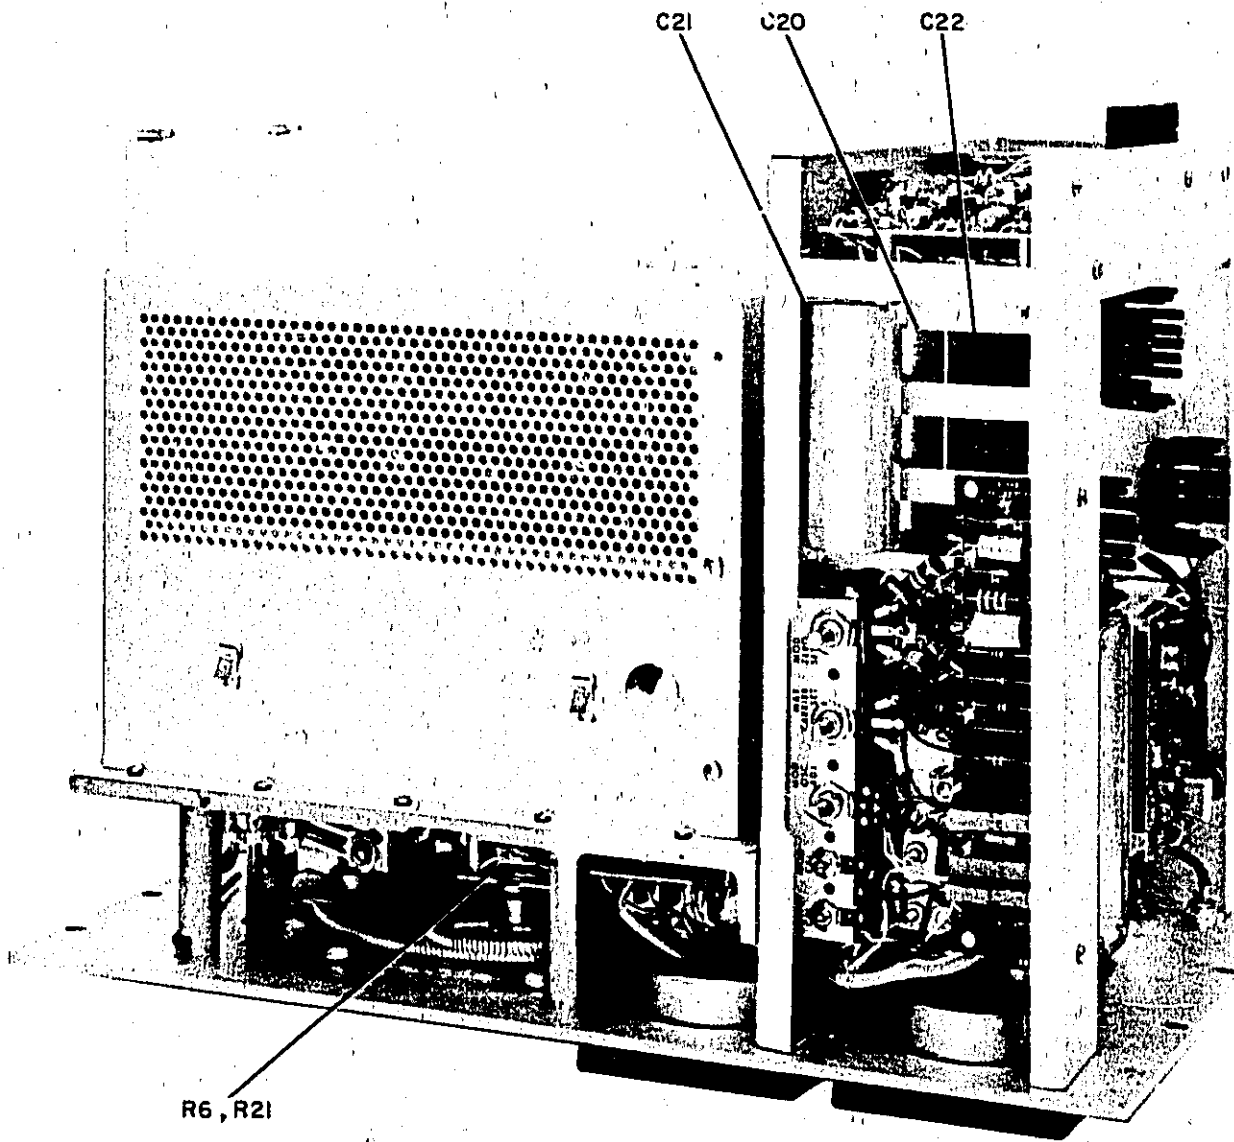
Interior View Showing Locations of Unlabeled Chassis Components
